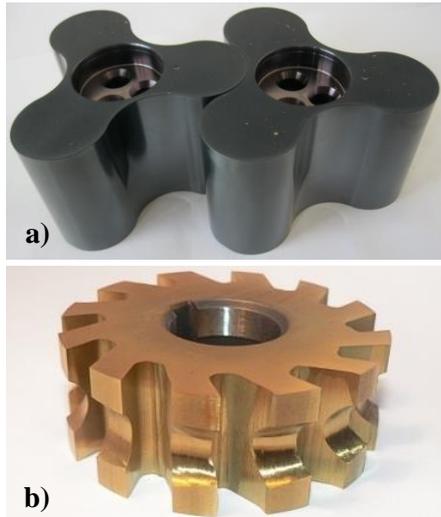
Coated samples: a) 3-lobed rotors and b) profile cutter
